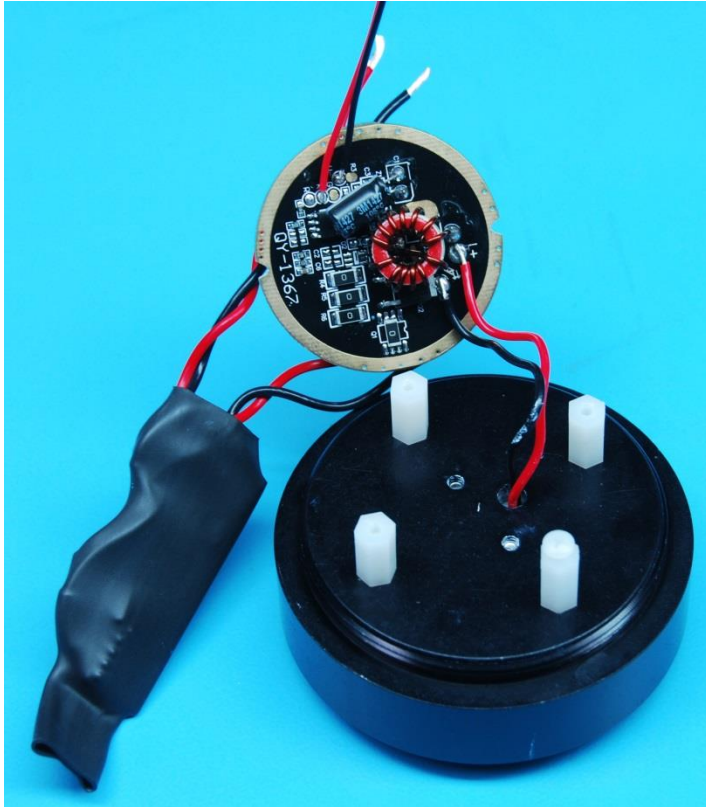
Driver board, DC-DC Converter, and LED board (under heatsink) wired together
